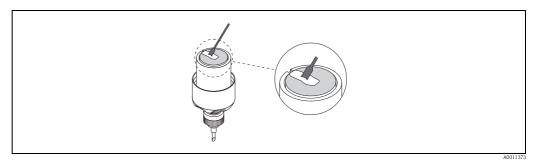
Coating the contact surfaces of the sensor with coupling fluid
